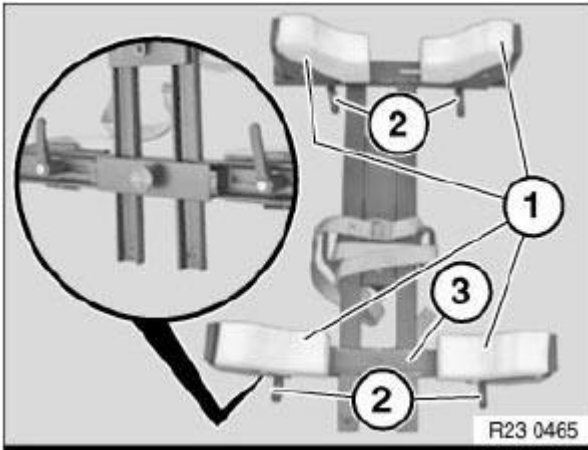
Identifying Front And Rear Supports, Carrier And Screws
